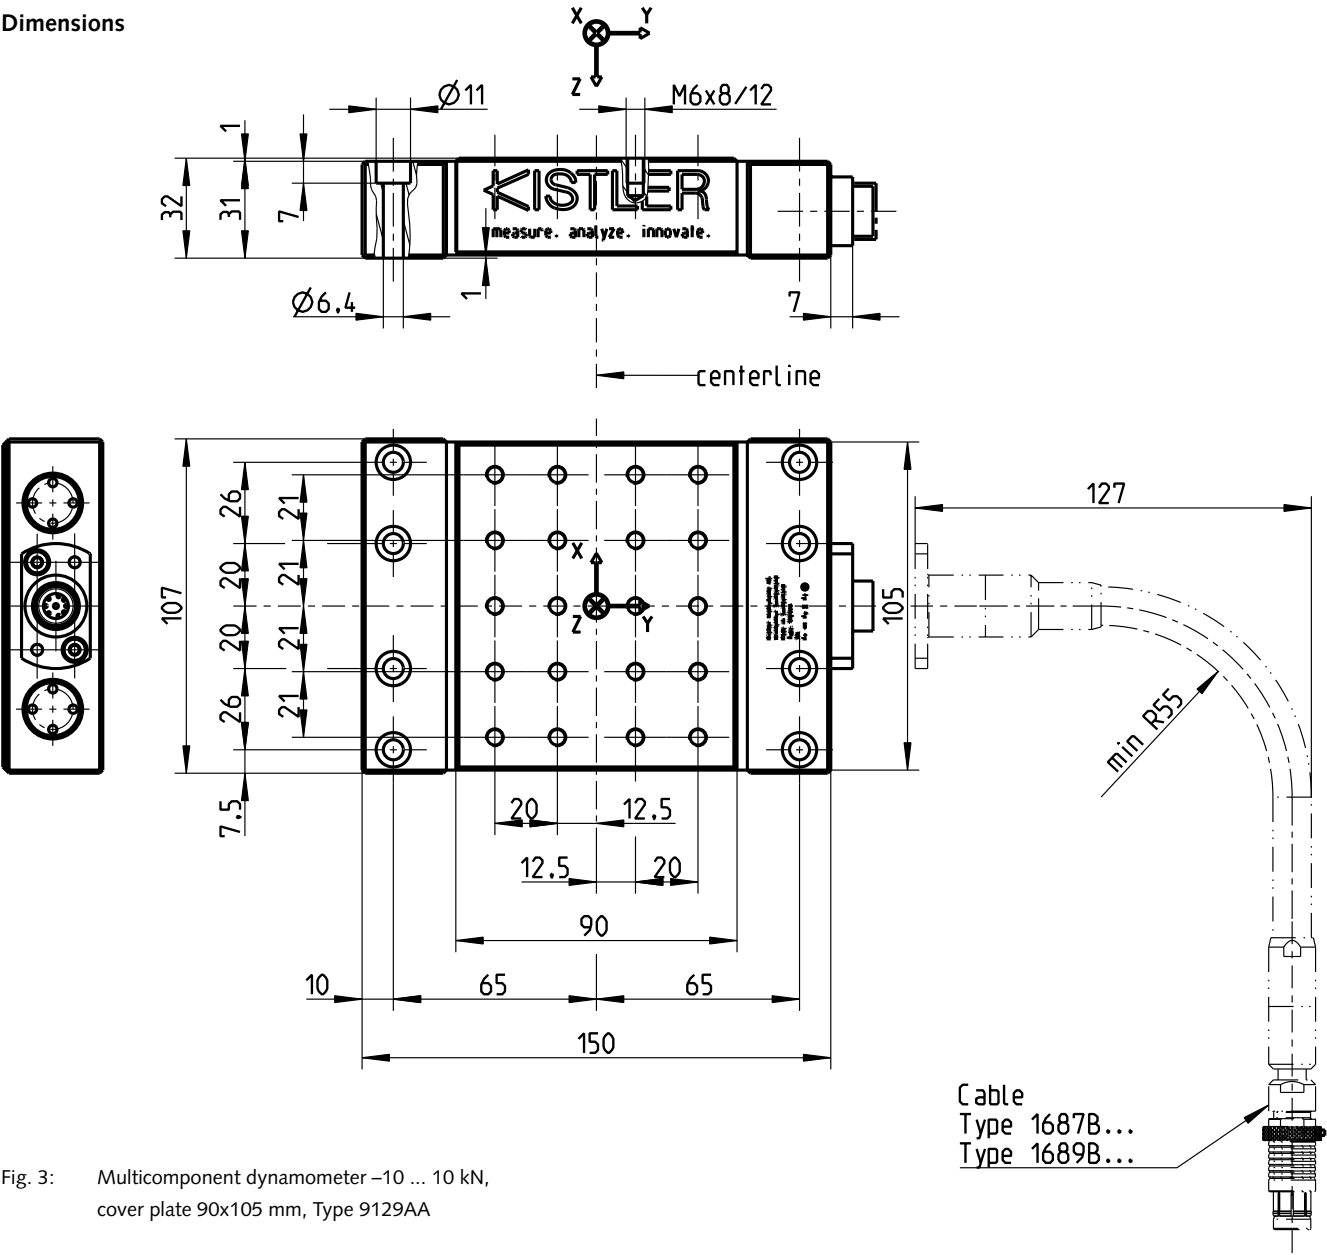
Multicomponent dynamometer –10 ... 10 kN,
